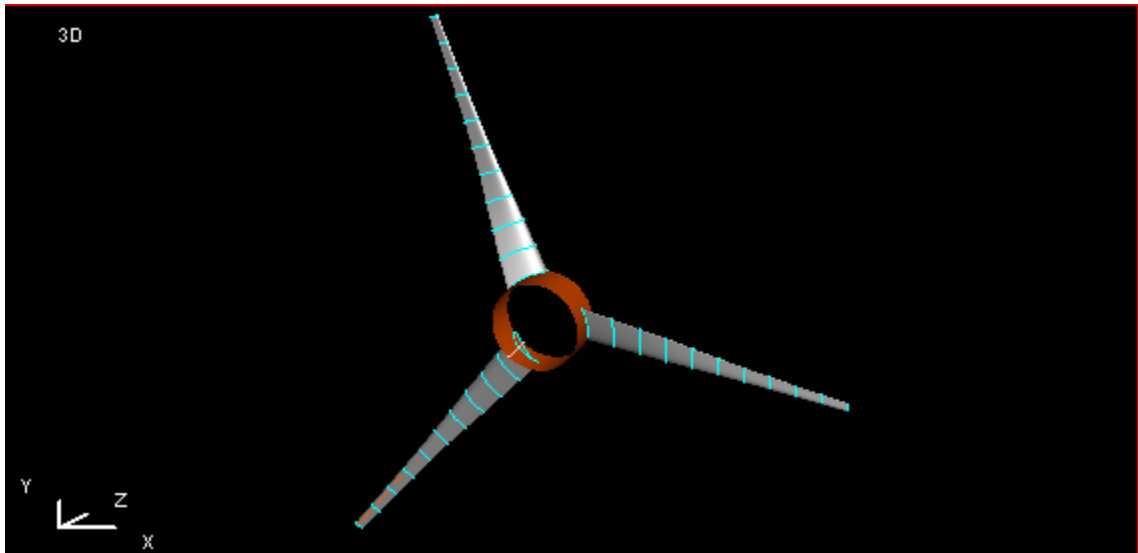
Geometry of 1 kW wind turbine rotor, AutoBlade™
